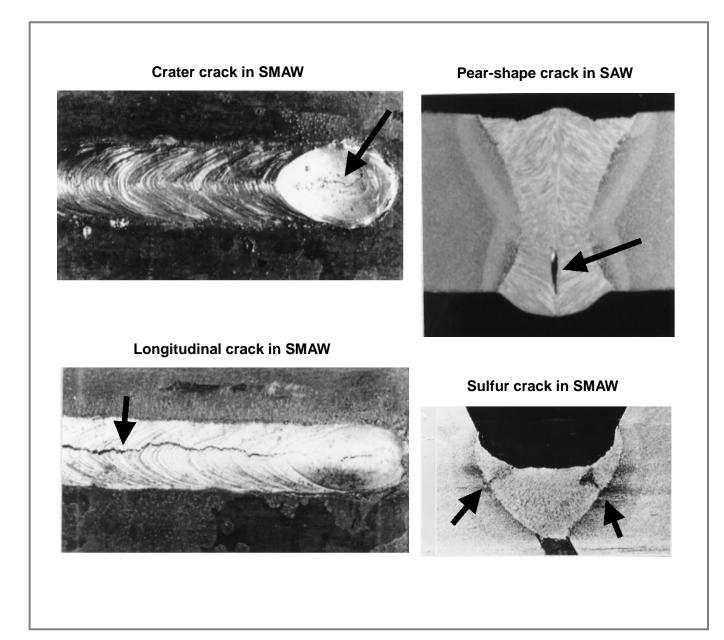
HOT CRACK (CRATER CRACK, LONGITUDINAL CRACK, PEAR-SHAPE CRACK, SULFUR CRACK)
